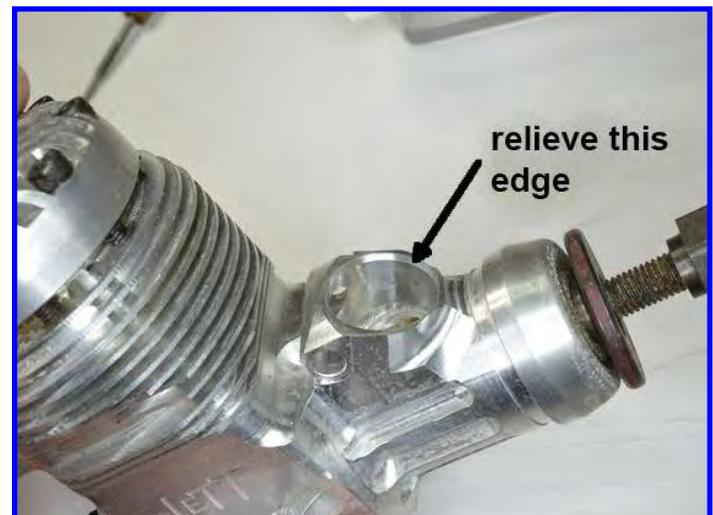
Sharp edge on chamfer in RO-Jett BSE case. Burnish this with a round screwdriver shaft, and use lot of oil when inserting the venturi. Make sure it actually goes into the bore and doesn't hang up on the corner.
